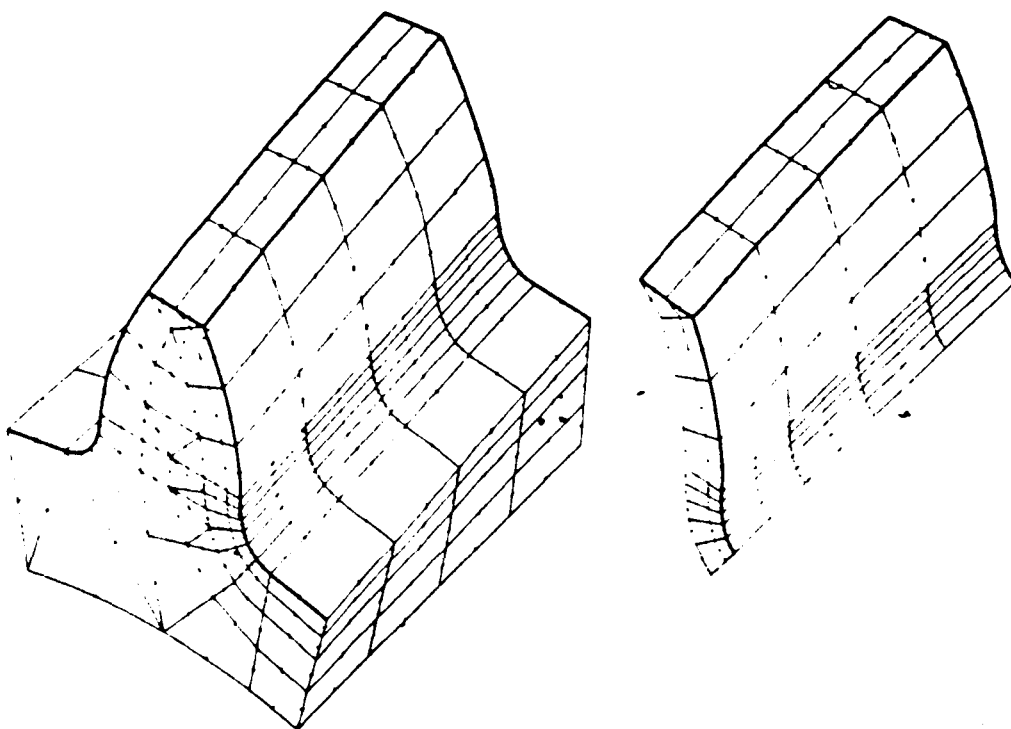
Helical gear tooth and contact zone divided into finite elements
